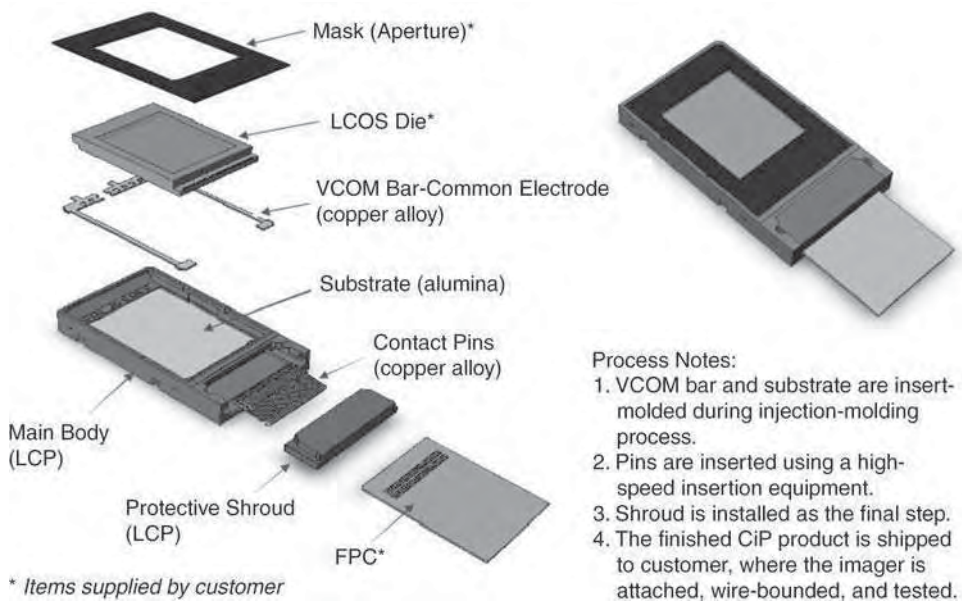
Package and assembly.²⁹ Reprinted courtesy of Quantum Leap Packaging Inc.
